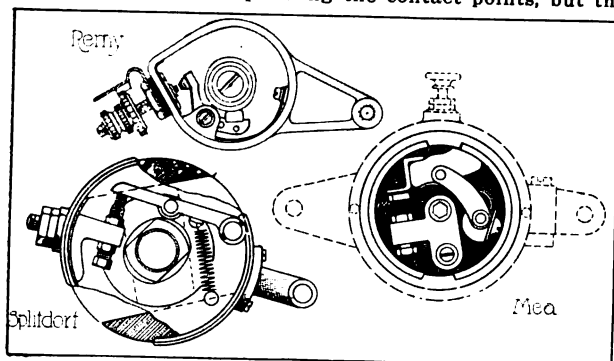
Components of Breaker Boxes of Conventional Magneton, Showing Contact Points and Adjusting Mechanism.
